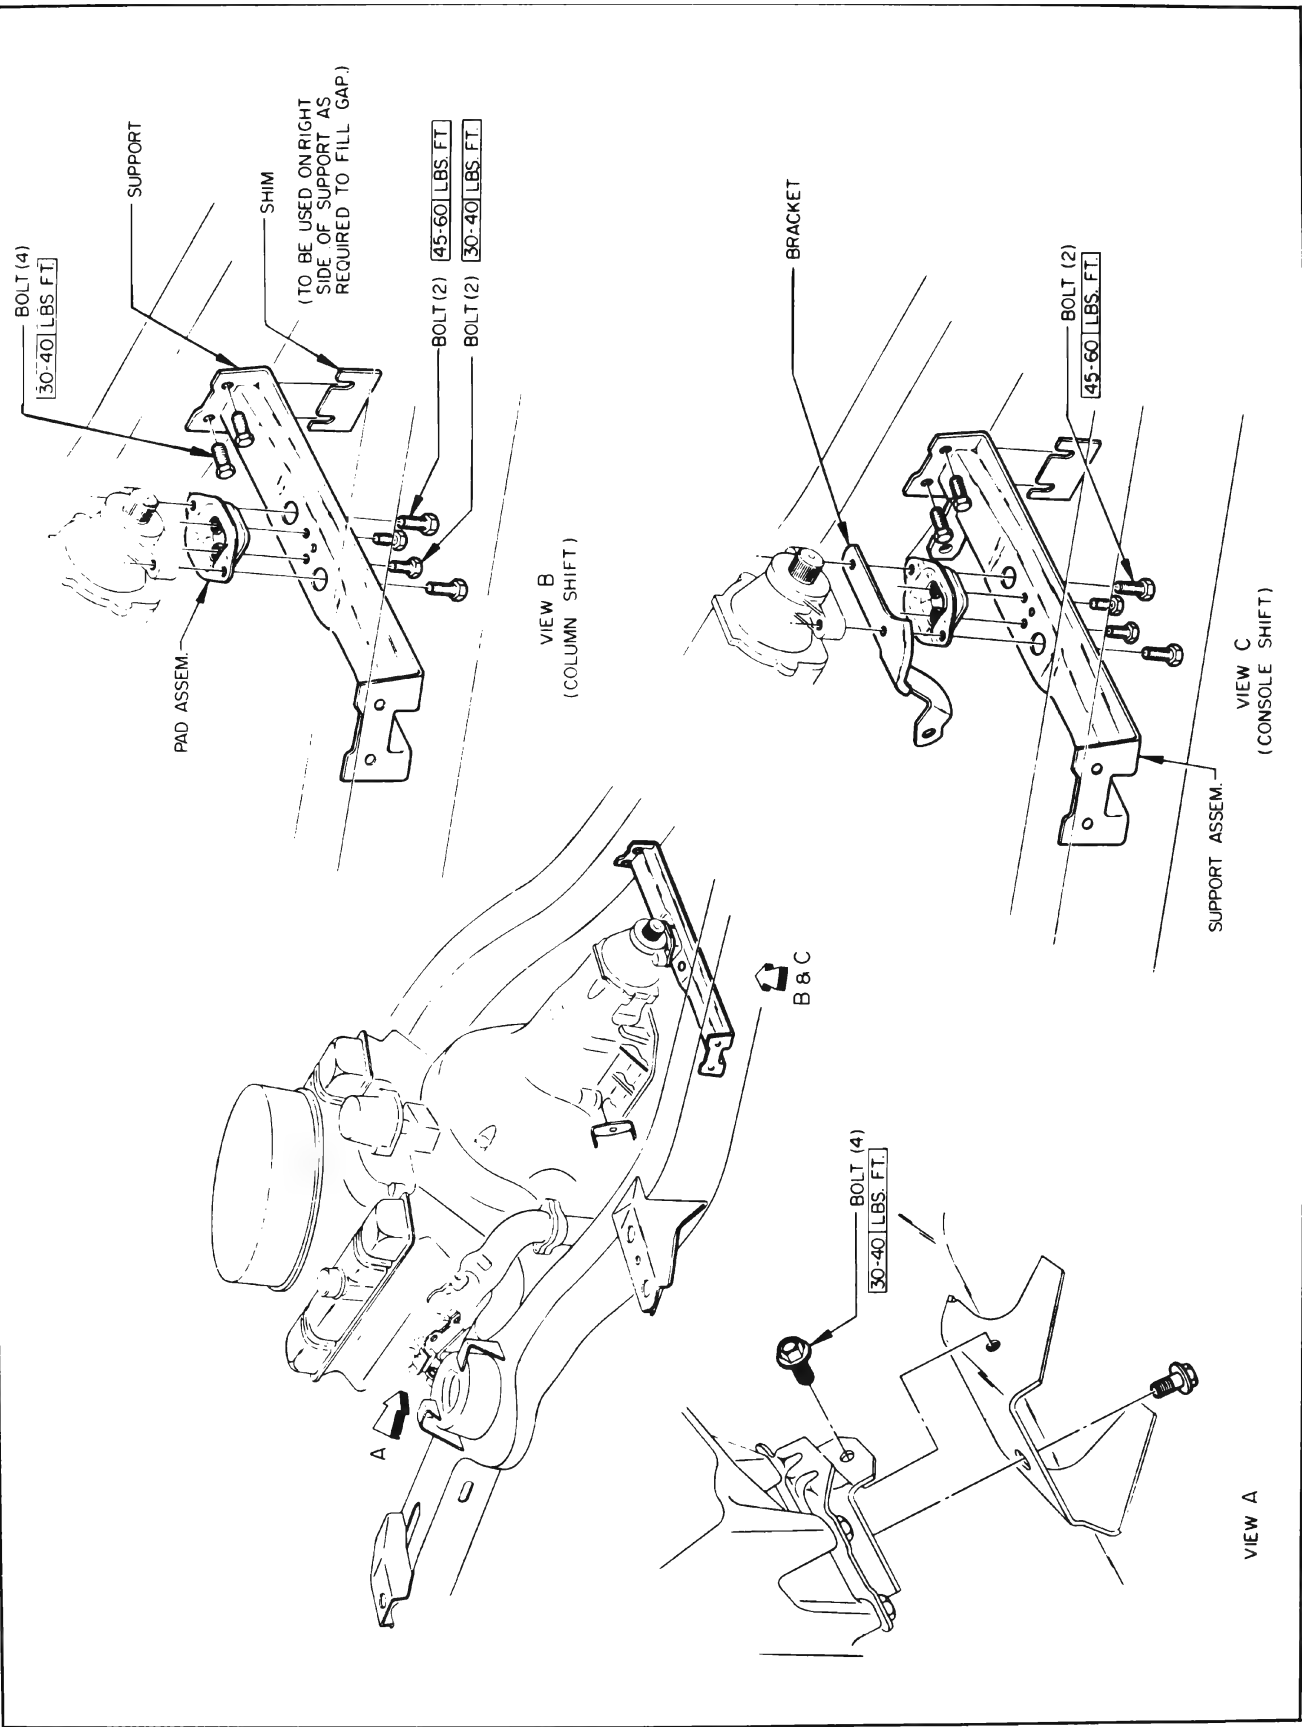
Engine and Transmission Mounts (4600-4800 Series)
